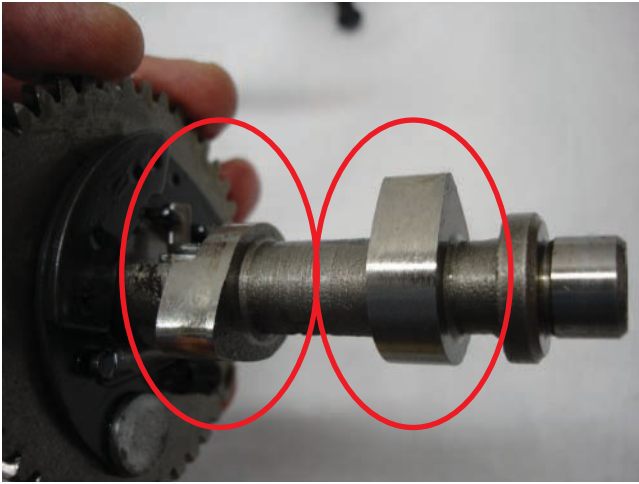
Camshaft lobes open and close valves, should be inspected visually, and are measured with a micrometer.
